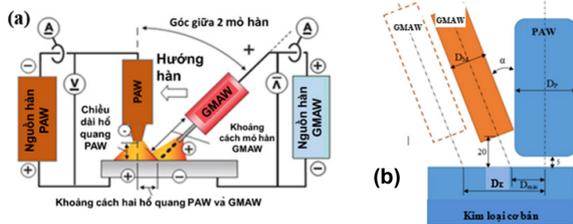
Schematic of Plasma-GMAW hybrid welding. (a) Off-axis arrangement of PAW and GMAW wire; (b) Hybrid processing torches for calculating position of head in detail.
